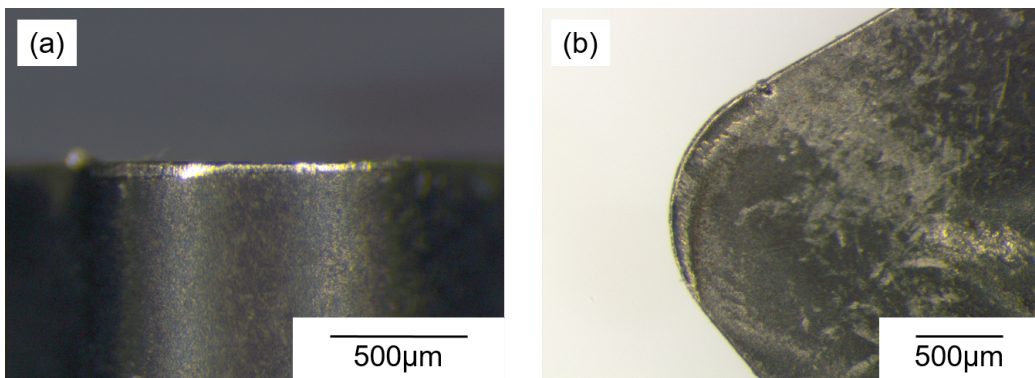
Microscope images showing the degree of tool wear after trial 3.2.4 on billet 4.1. Showing (a) the flank face and (b) the rake face.
